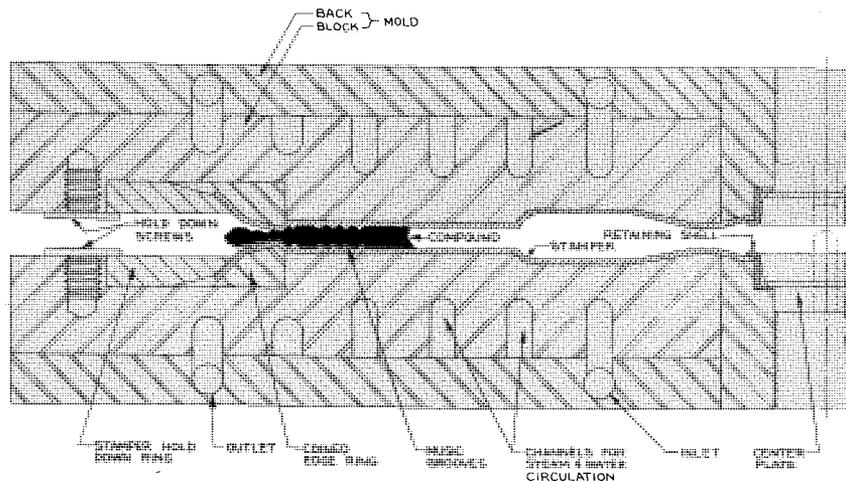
Pictorial drawing of cross section of record being molded, showing tool assembly.
